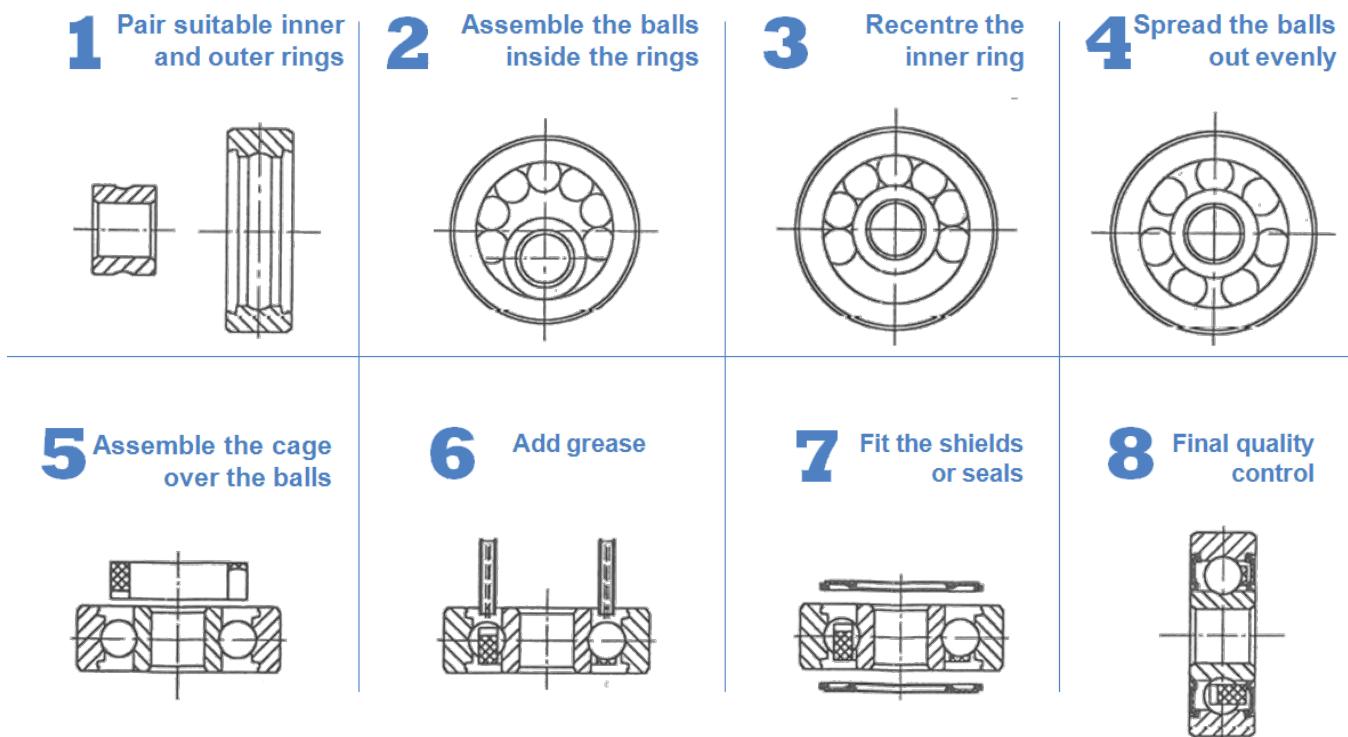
Assembly of Ball Bearing Source: [Link](#)
